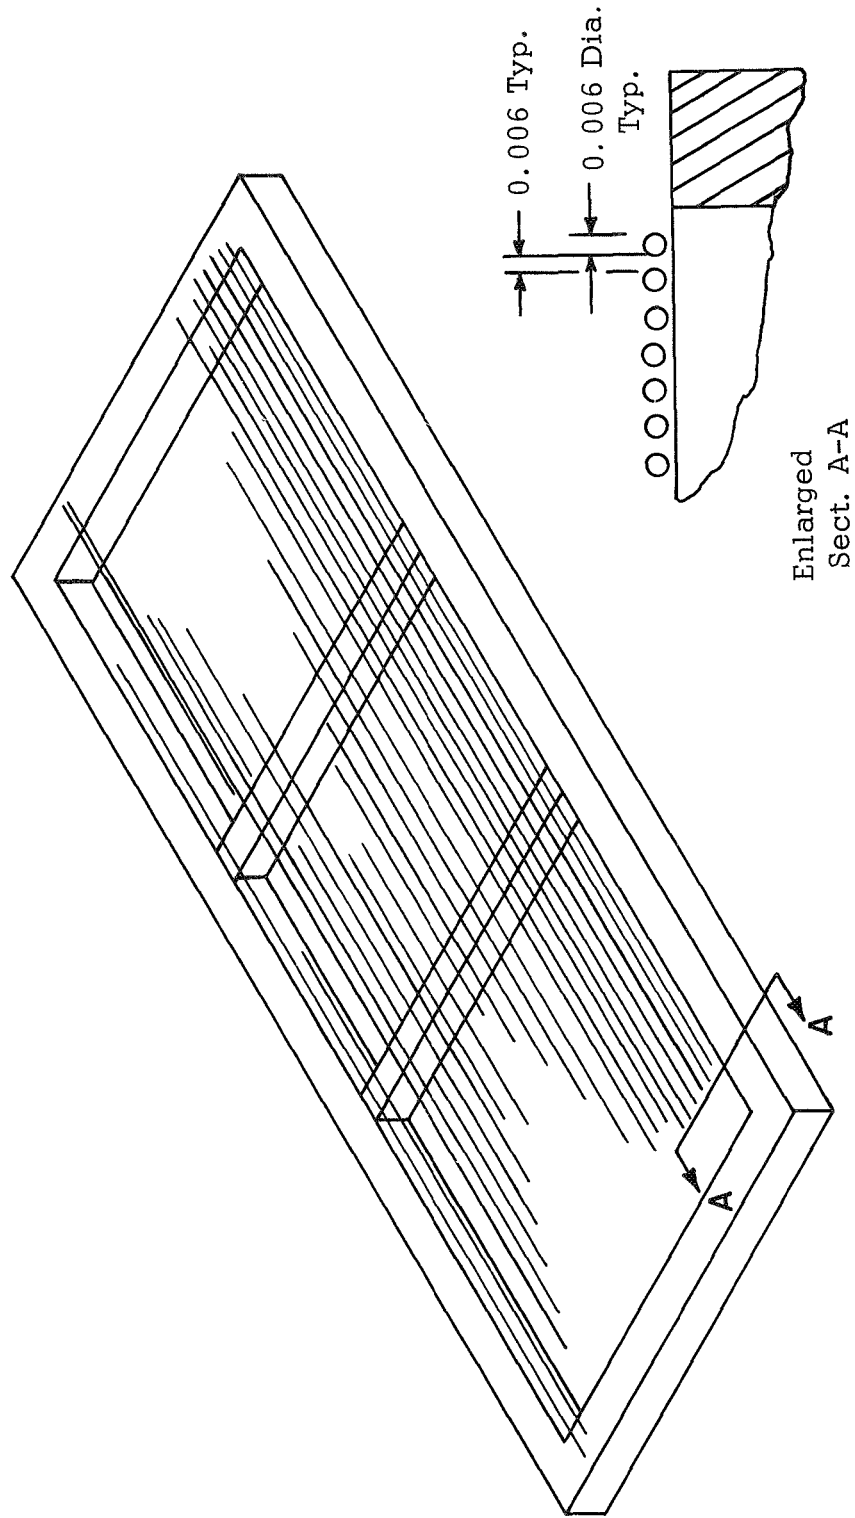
LAD Collimator Wire-Wound 6-mil Tungsten or Palladium Construction Technique
